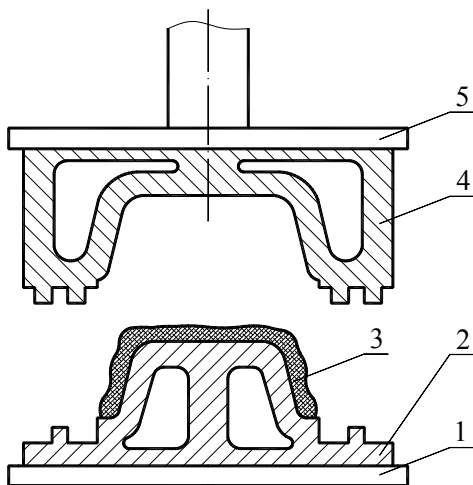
Pressing product in a closed mold: 1 – a fixed plate of press; 2 – punch; 3 – work piece; 4 – matrix; 5 – moving plate of the press [own study]
